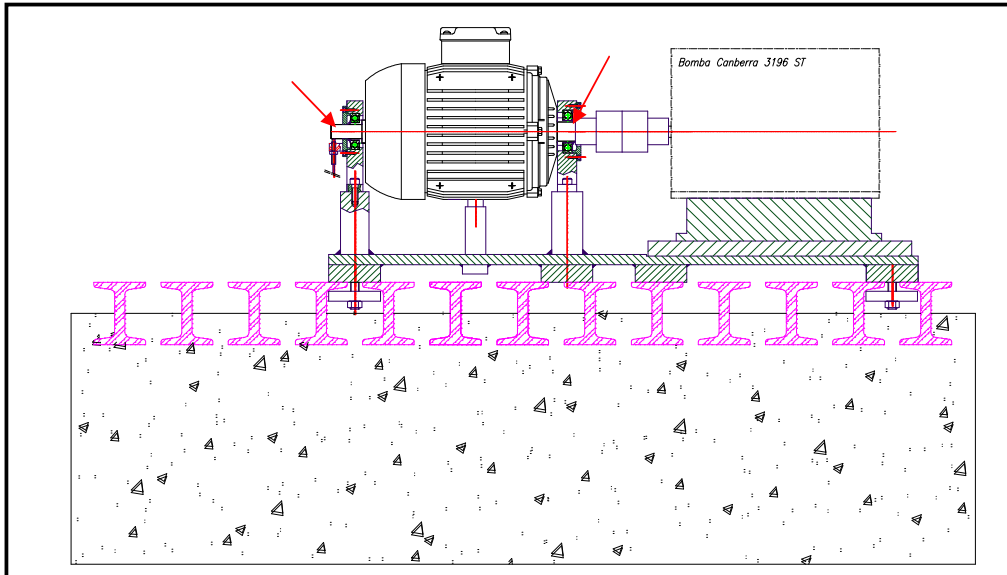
Electric motor assembled. The arrows indicate the double shaft.
